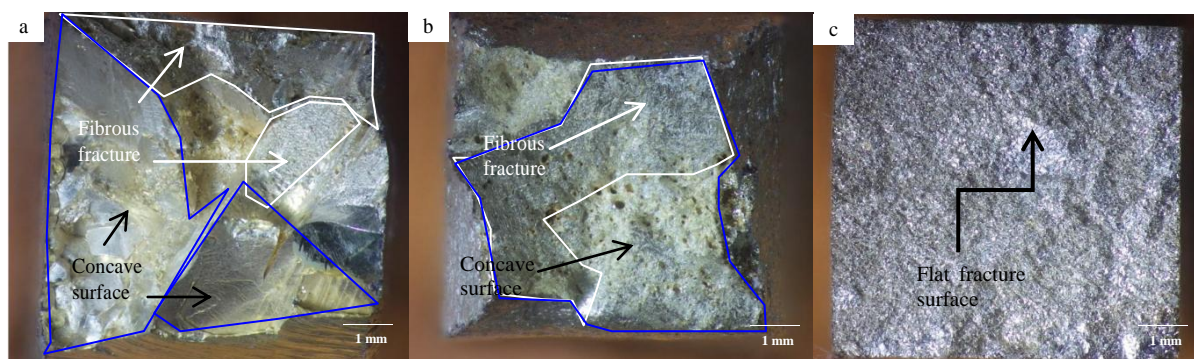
Fracture surfaces of as-homogenized Cu-28Zn tensile testing specimen with addition of (a) 1.9, (b) 5.7, and (c) 6.2 wt. % Al
